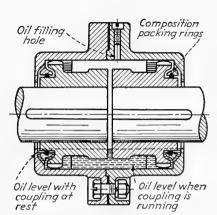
The Poole Engineering & Machine Company uses a two-piece floating sleeve with the internal gear teeth cut at each end, meshing with gear teeth on hubs. Toothed hubs are mounted at the end of each shaft. The hub teeth have spherically formed crowns. The teeth are in mesh around their entire circumference. Compensates for misalignment in all directions without the use of flexing materials. Bearing surfaces are lubricated in a bath of oil. Dust is excluded by packing ring at either end.
